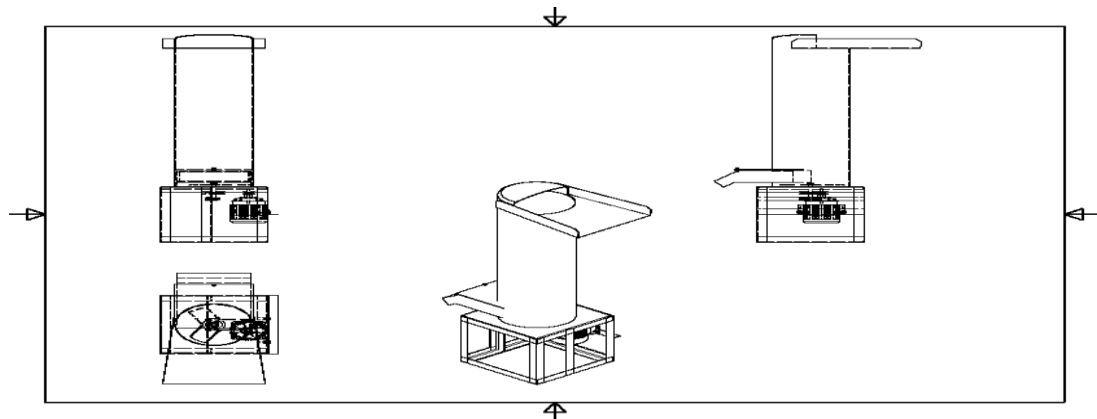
Autographic view of the prototype agricultural waste shredding machine.
